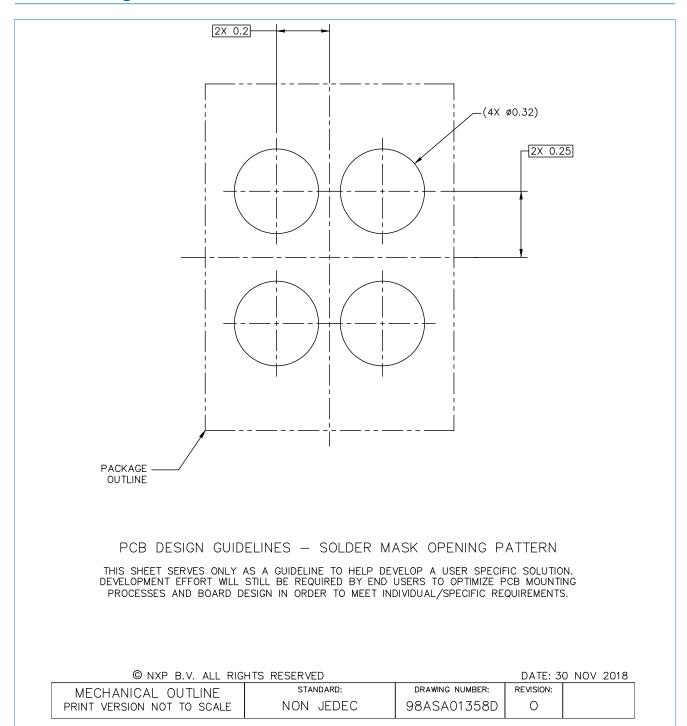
Reflow soldering footprint part1 for WLCSP4 (SOT1375-5)
